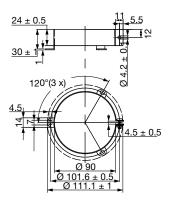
Dimensional outline of clamp for case  $\emptyset$  D = 90 mm
